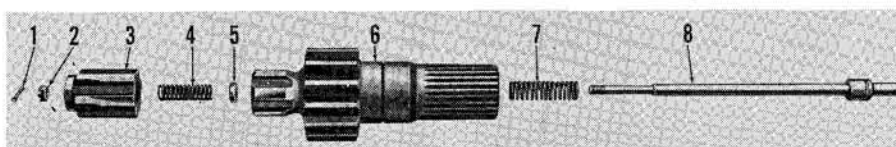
Exploded view of right bull pinion and differential lock assembly. Protrusion of rod (8) is adjusted by nut (2); refer to Fig. 151.
